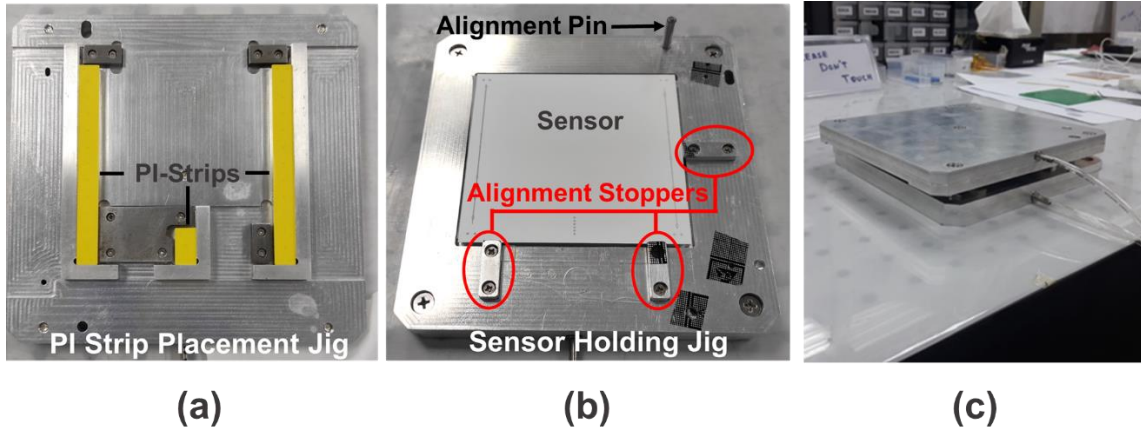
(a) PI strip placement Jig. (b) Sensor holding Jig, showing alignment stoppers inside the red circle and an alignment pin used to guide the PI strip placement jig. (c) The PI strip placement jig placed on the sensor holding jig for strip transfer.
